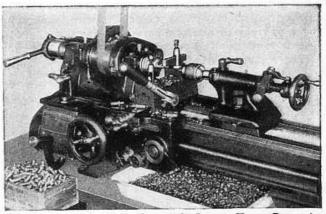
11-inch Lathe with Lever Type Draw-in Chuck, Tail Stock and Cross Slide
